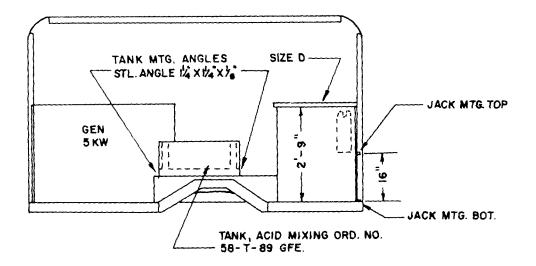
Floor plan, trailer mounted Shop Set C-2, Left side view.
